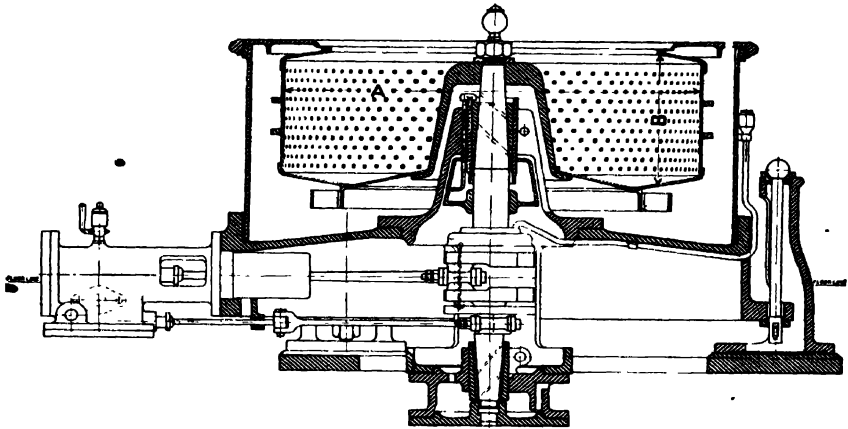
SECTION OF STEAM-DRIVEN HYDRO-EXTRACTOR.
